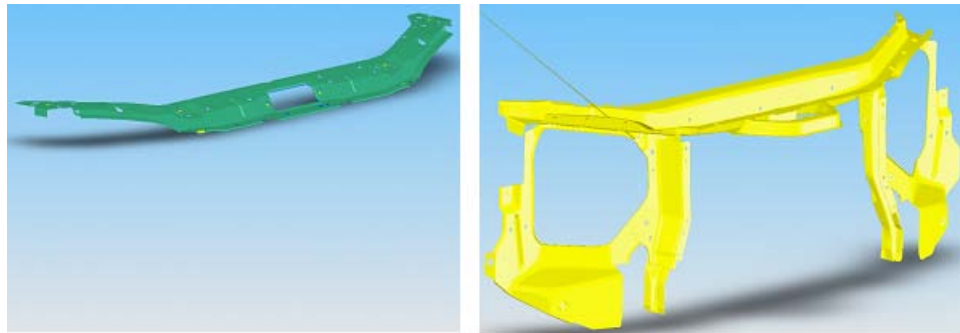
Upper and lower subassemblies that are the input components for the final assembly operation.
